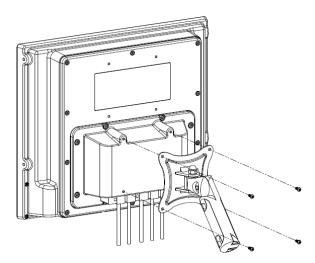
VESA Mounting Using the Cable Entry Cover
